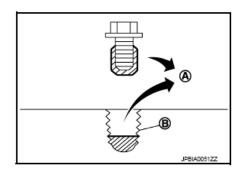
Removing Liquid Gasket From Bolt Hole And Thread Courtesy of NISSAN NORTH AMERICA, INC.
